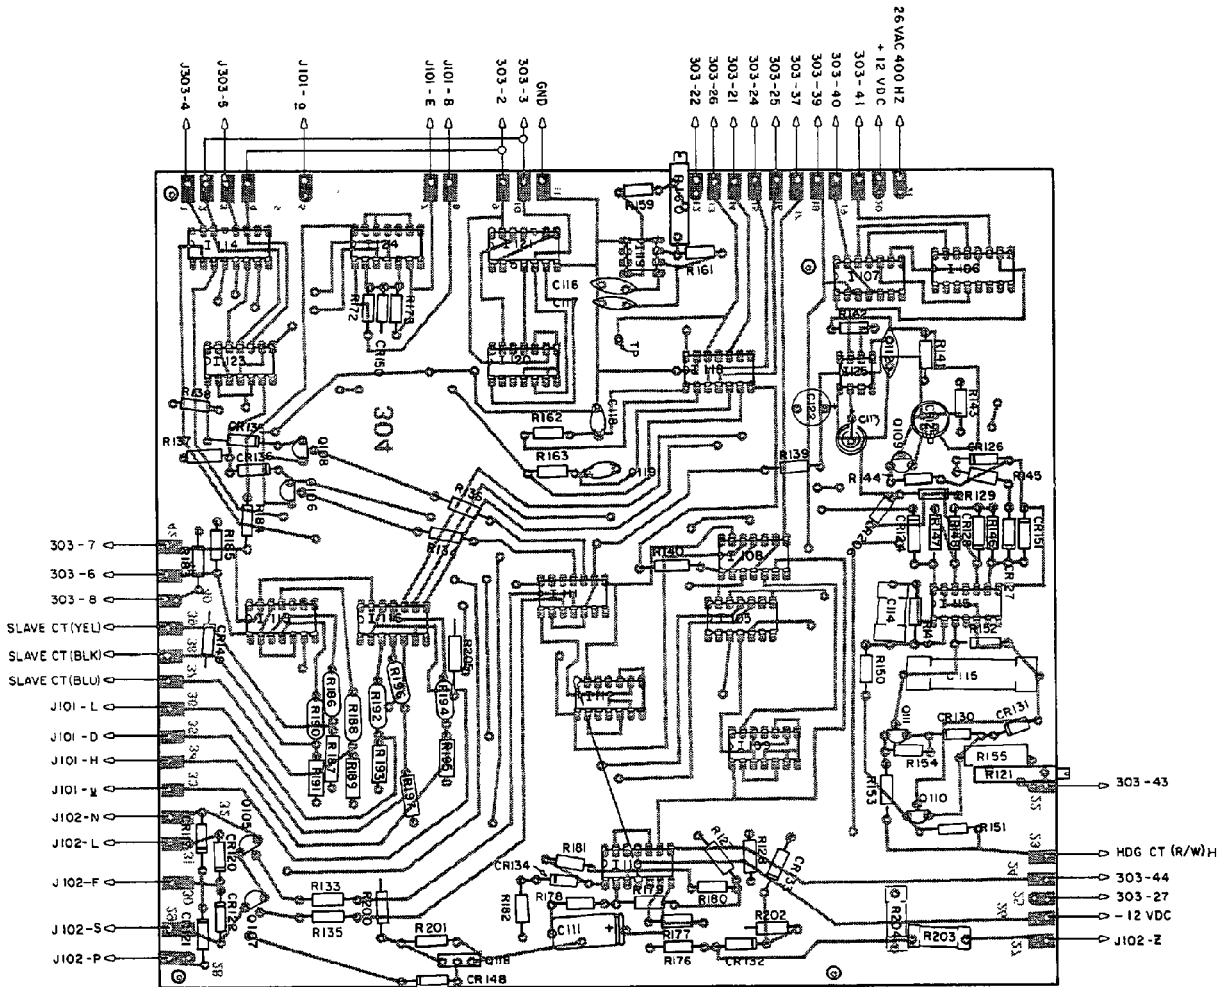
A P.C. BOARD ASSEMBLY, BOARD 304, DRAWING (Dwg. 300-05988-0000 Rev. 0)
